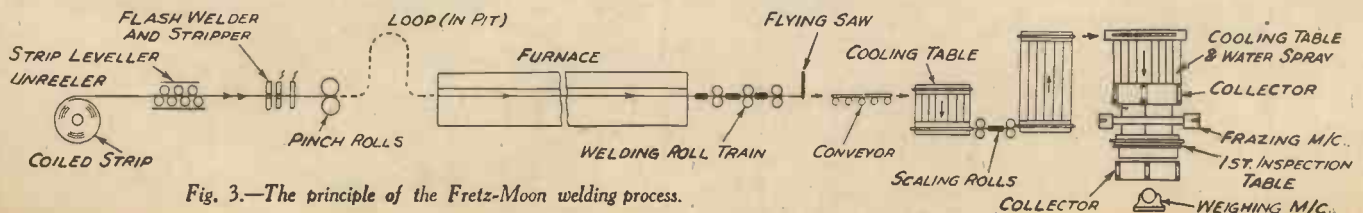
The principle of the Fretz-Moon welding process.
